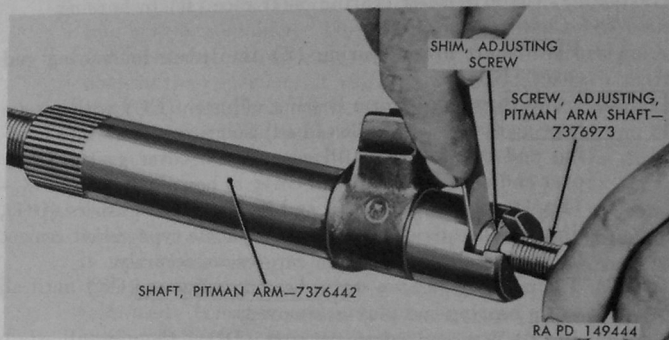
Method of adjusting Pitman arm shaft adjusting screw.
